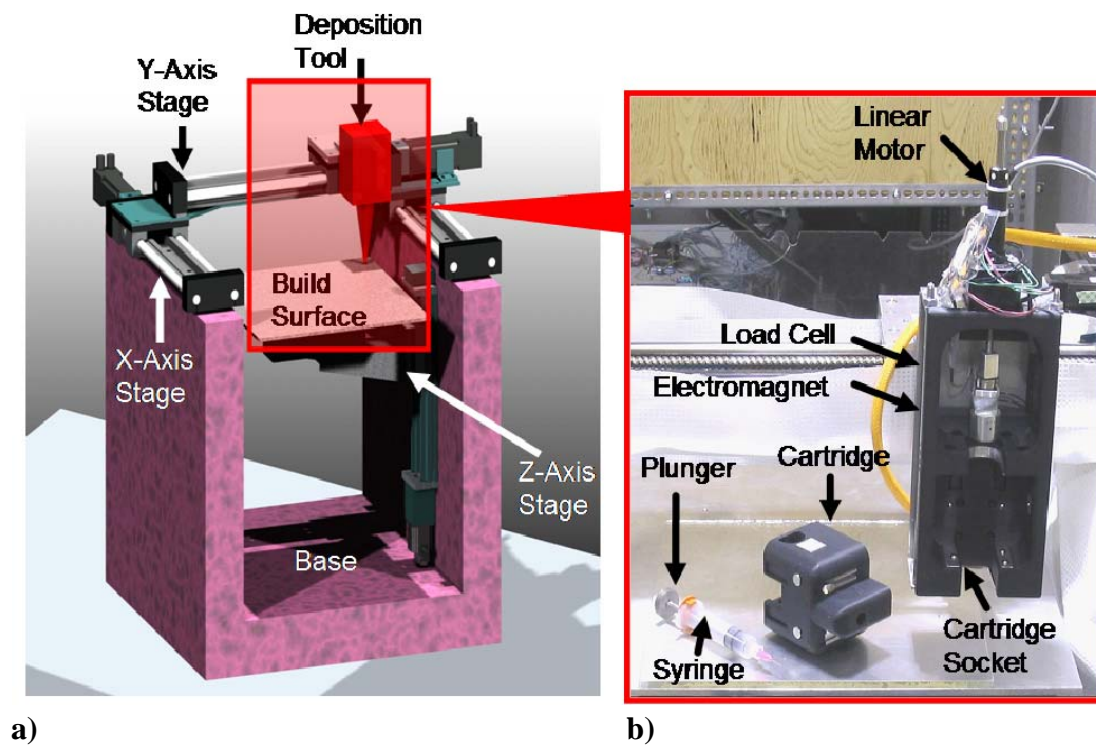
Robotic printing platform. (a) CAD rendering of gantry robot. (b) Close-up view of deposition tool.
